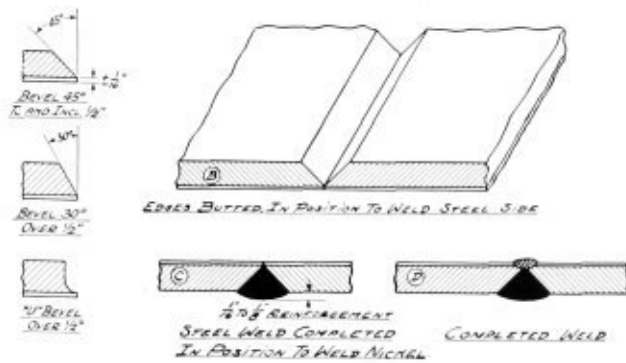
Butt welded joint, metallic arc welded
